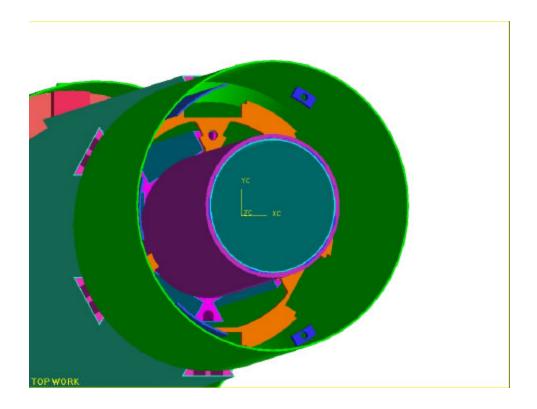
Location blocks on inner surface of L1 carbon tube.
